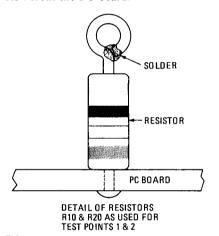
TEST POINTS consist of 10-ohm, $\frac{1}{2}$ -watt resistors soldered upright on the board.
